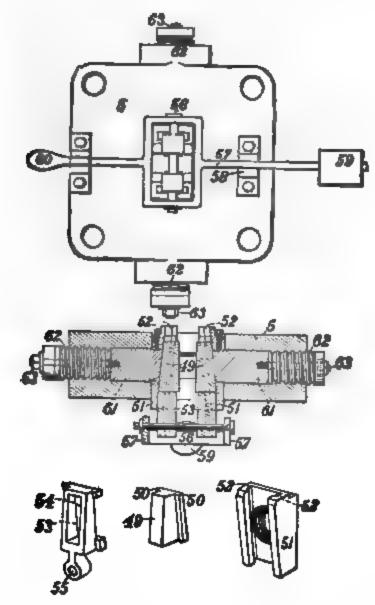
DRAW-HEAD TO OLSEN'S TESTING-MACHINE.
